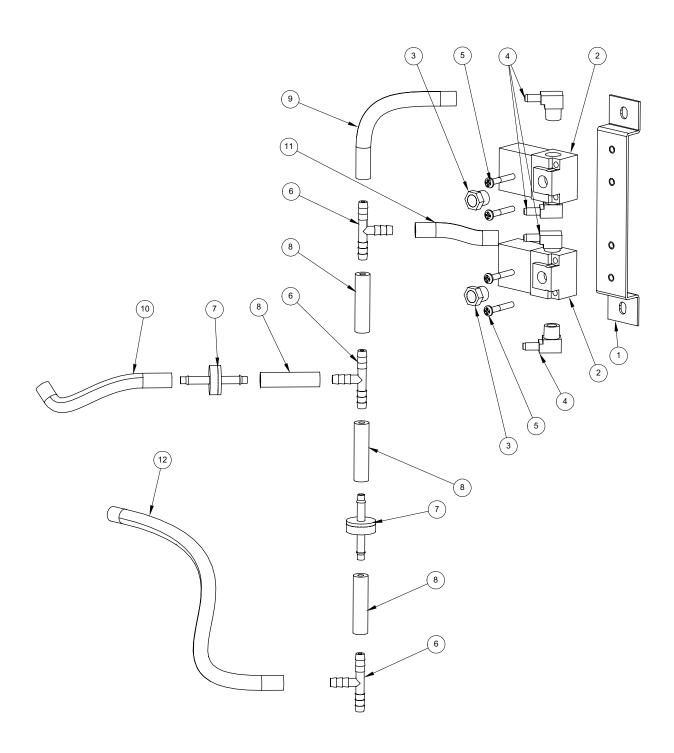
Purge Valve Assembly C-6161 Rev -
